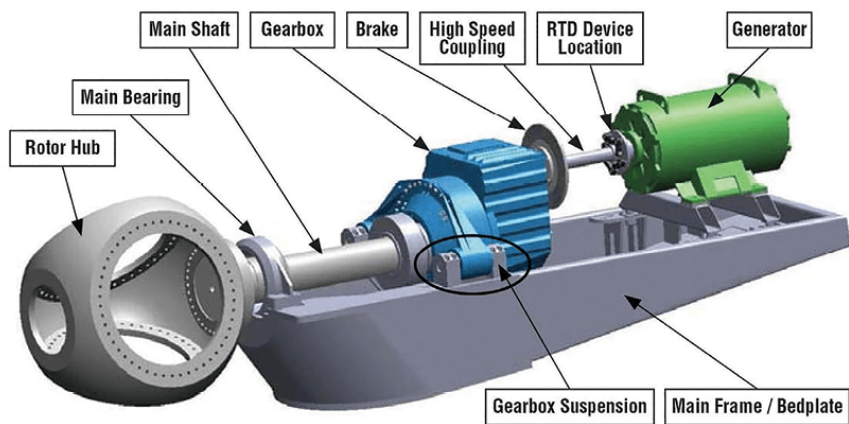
Wind turbine three-point drivetrain model [40]
